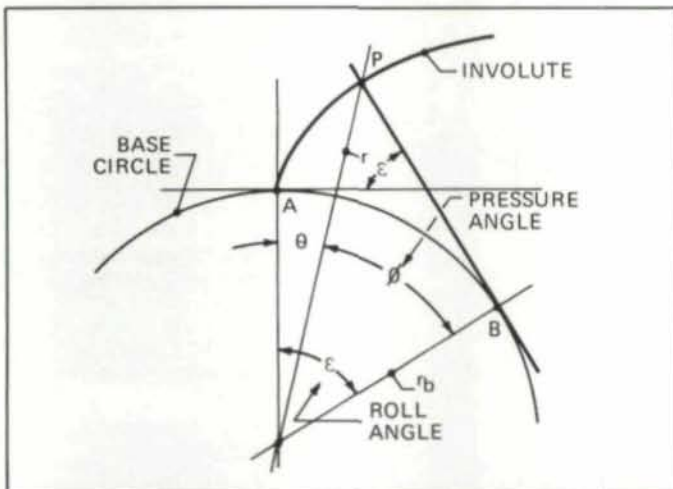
This drawing defines Roll Angle (ϵ), Pressure Angle (ϕ) and Polar Angle (θ).
